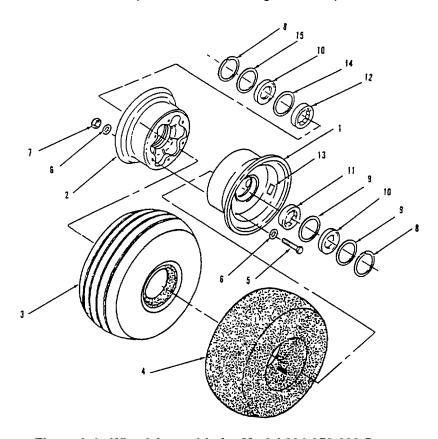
Wheel Assembly for Model 204-050-200-5
